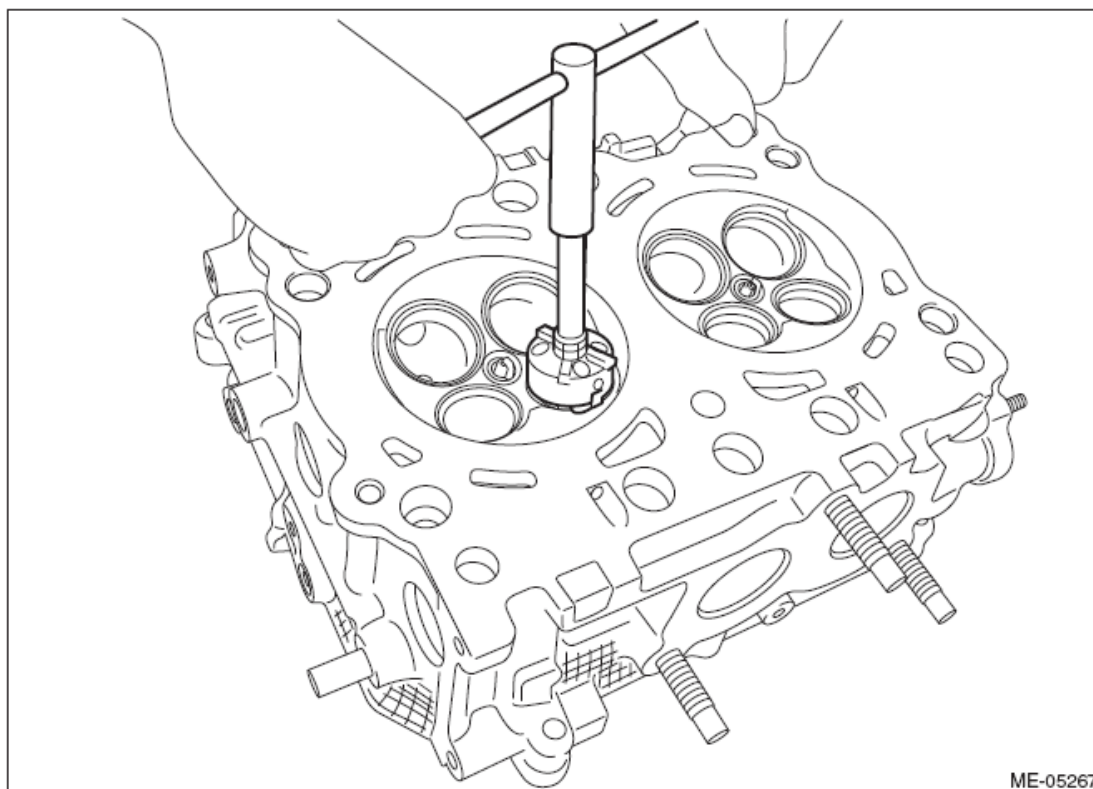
Checking Seating Position Between Valve And Valve Seat
